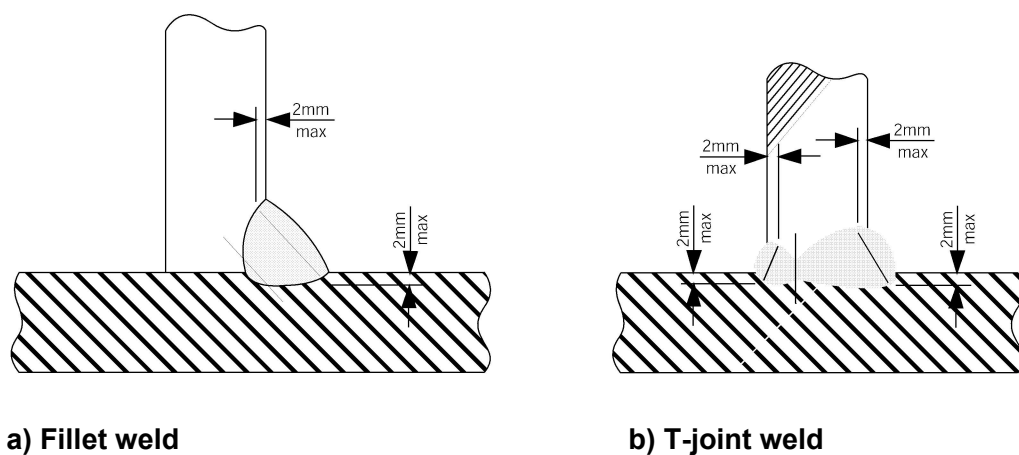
Examples of hardness test with row indentation (R) in fillet welds and in T-joint welds
